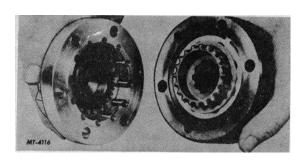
Clutch Body and Hub Body Properly Assembled (Lock-O-Matic)
